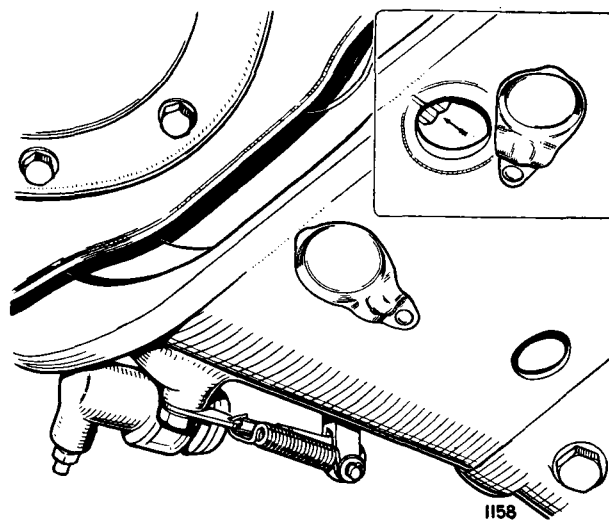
Showing the location of the Top Dead Centre marks on standard transmission cars as viewed from below with the dust cover moved to one side. (Early cars).
